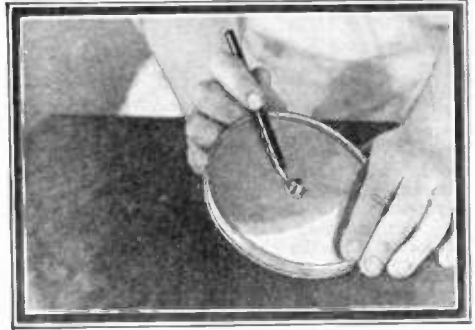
The bushing is then fitted through the center hole of the disc and the retaining nut is fastened down. Care must be taken that the insertion of the bushing does not throw the disc out of line.
